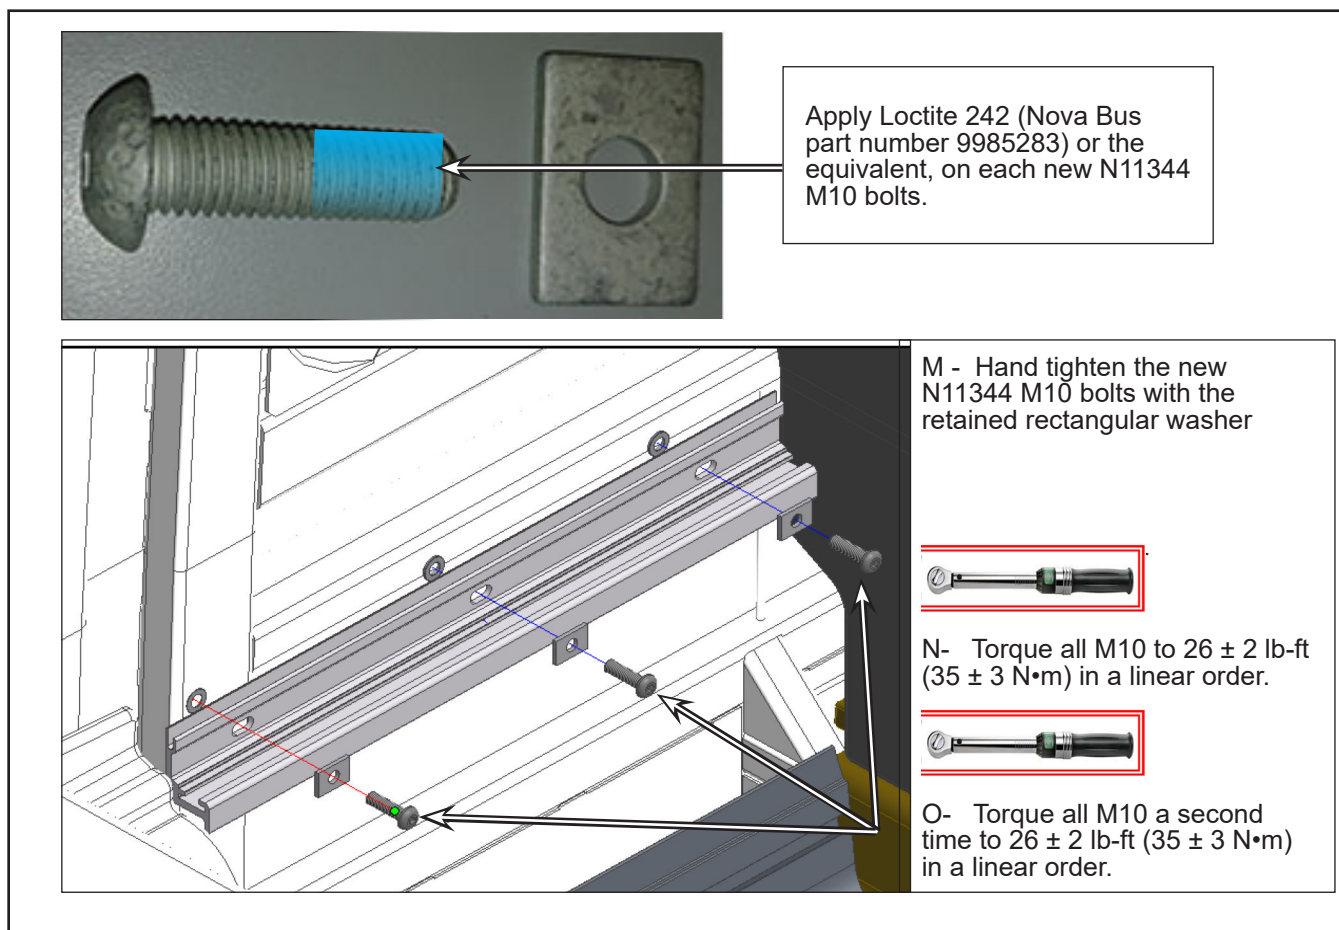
Preparation and Torque to Apply on New N11344 M10 Bolts
